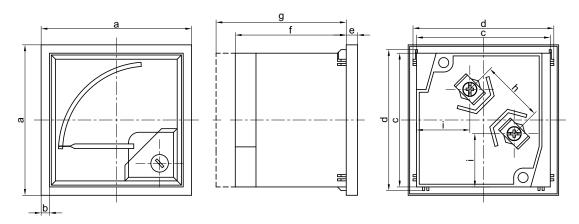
External dimensions of MA16. MA17. MA19. MA12
